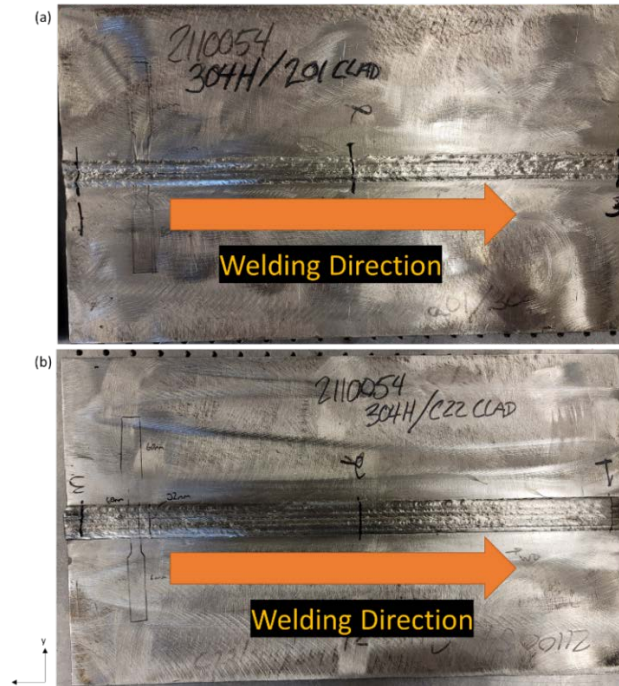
(a) 304H/Ni201 and (b) 304H/C22 explosion clad plates root side with the welding direction and XY axes marked out
